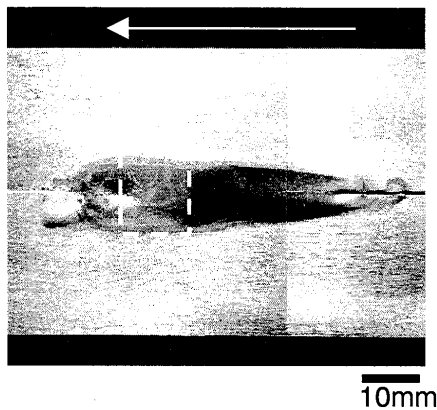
Typical bead appearance welded with developed system in a horizontal position under microgravity.
